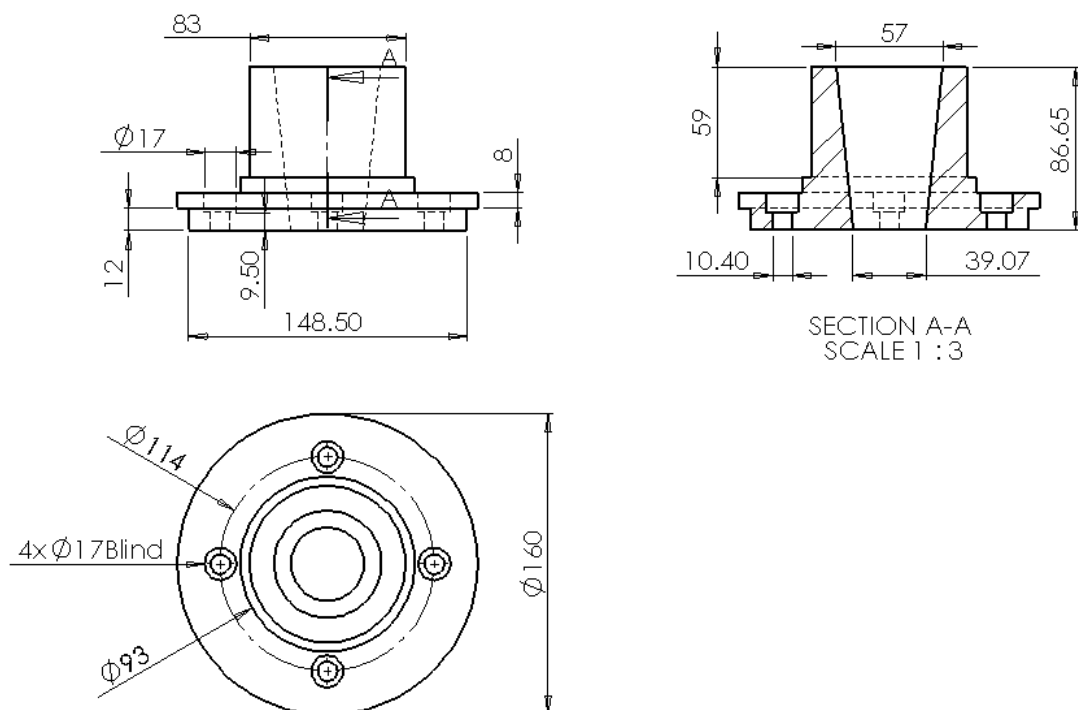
CAD drawing of the spindle fitting between steel die and motor
